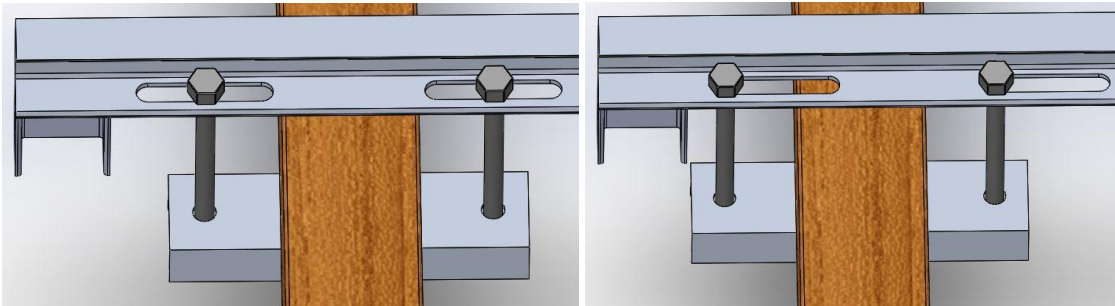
Adjustable Positioning of the Support Beams (3D CAD Model)
